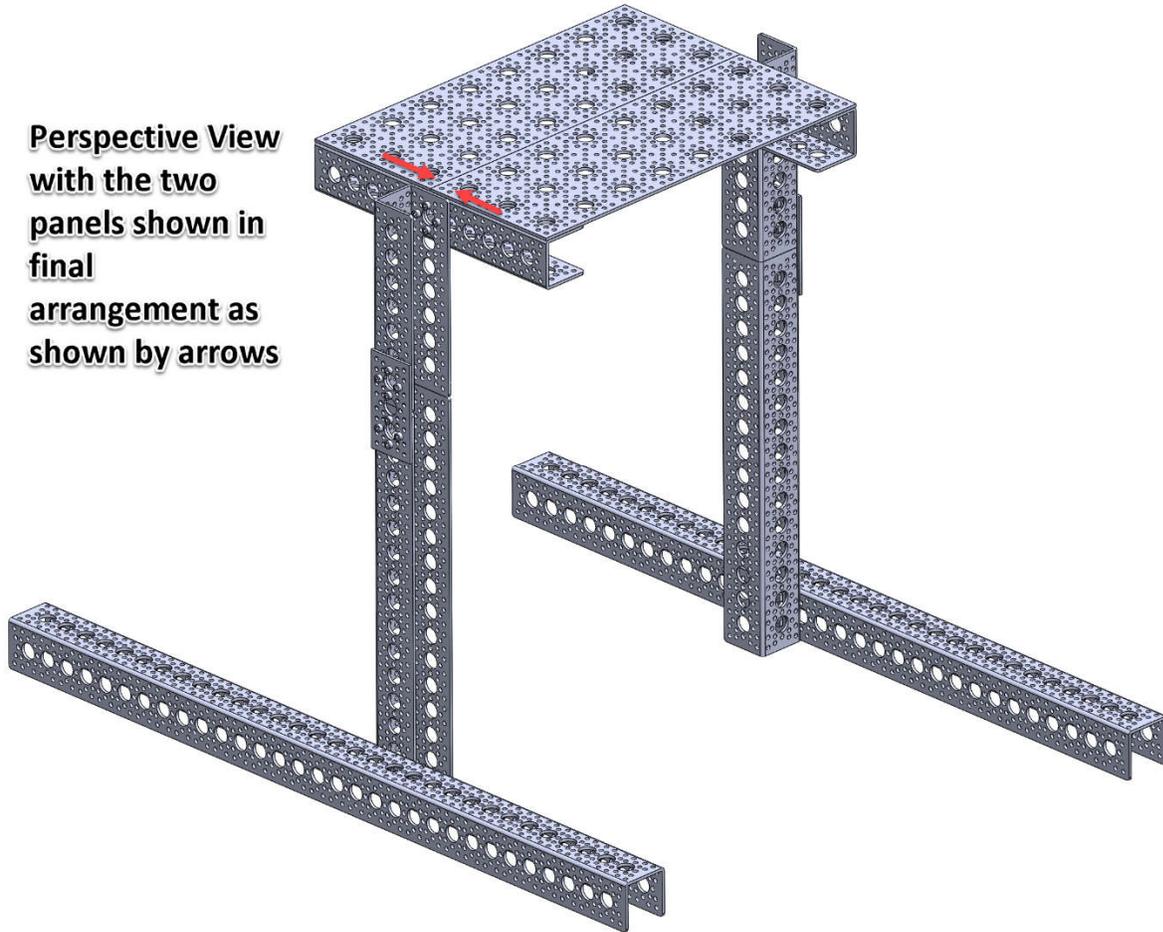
The final position of the roof panels shown as correctly installed. Note that the arrows are pointing towards each other indicating that the roof is correctly installed.
